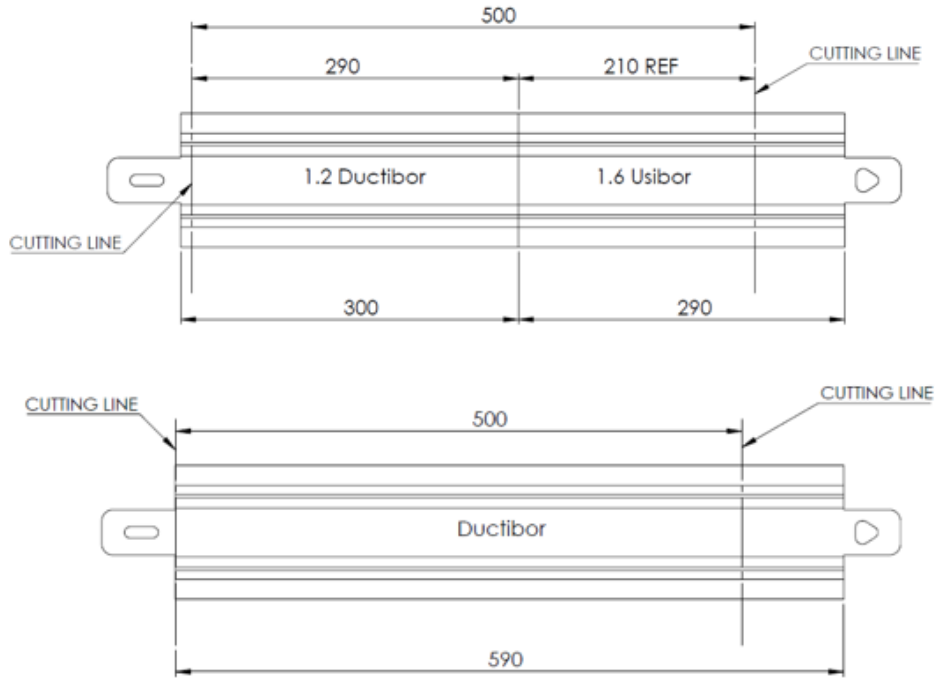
Trim lines on channels for axial crush. Dimensions in millimeters.
